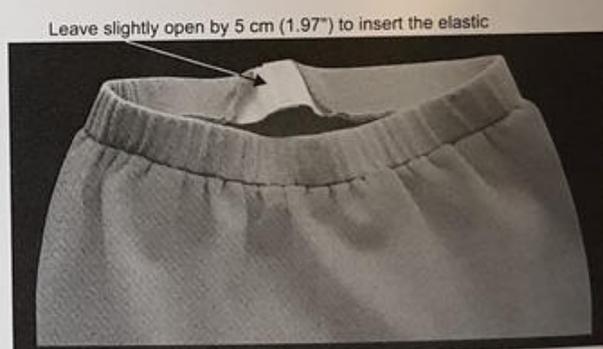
Place the belt on the garment "right" side to "right" side and sew after having removed the gathering threads, making the markings of the two parts match up
